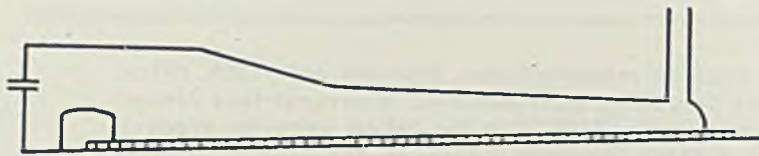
A—Vertical cross section through a continuous pusher-type furnace with side door discharge. Pusher mechanism is installed at right end of the drawing. Burner is indicated at the left or hot end of the unit, although some modern furnaces are fired from the right or cold end and then are called "inverted" furnaces
